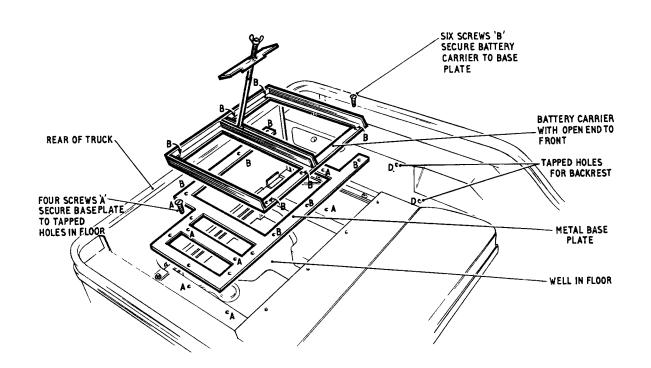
METHOD OF FITTING THE BATTERY CARRIER AND BASEBOARD
